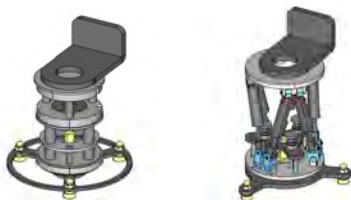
Coating Thickness Measurement Tool (Type1, Type2)
